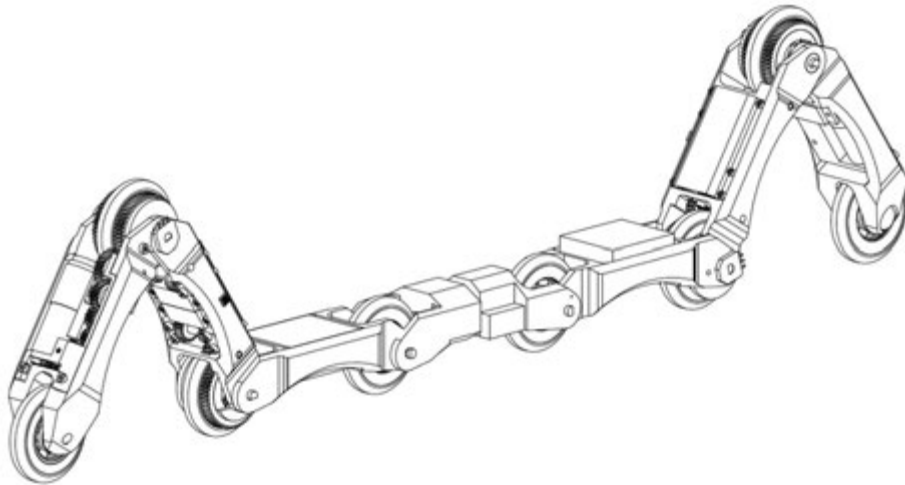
Schematic drawing of the pipe inspection robot - *image from [104]
